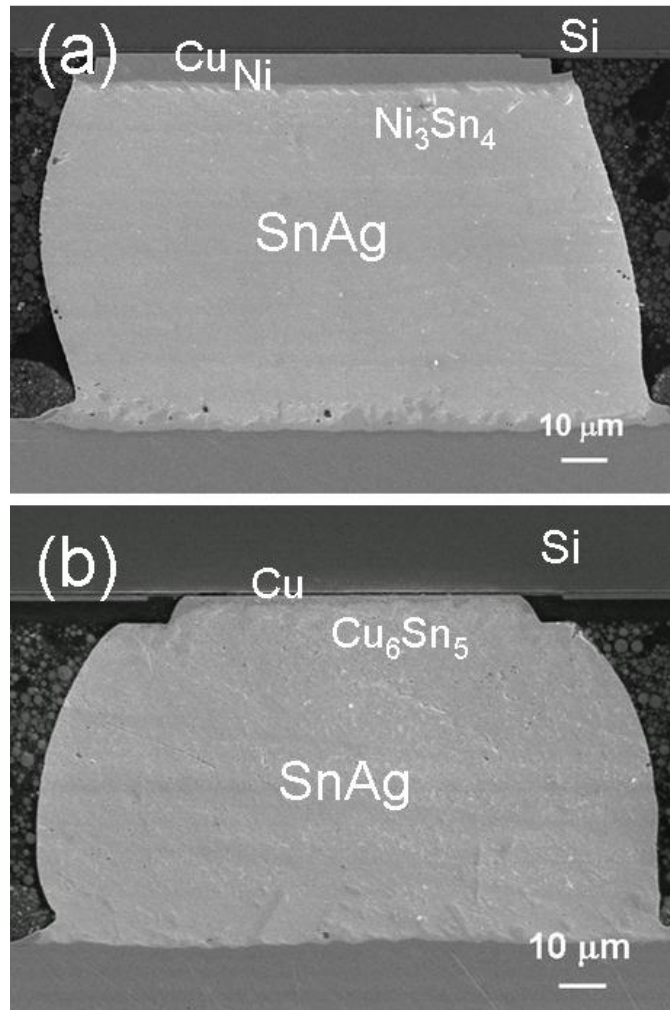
The corresponding cross-sectional SEM images for solder bump before current stressing. (a) SnAg solder with CuNi UBM (b) SnAg solder with Cu UBM.
